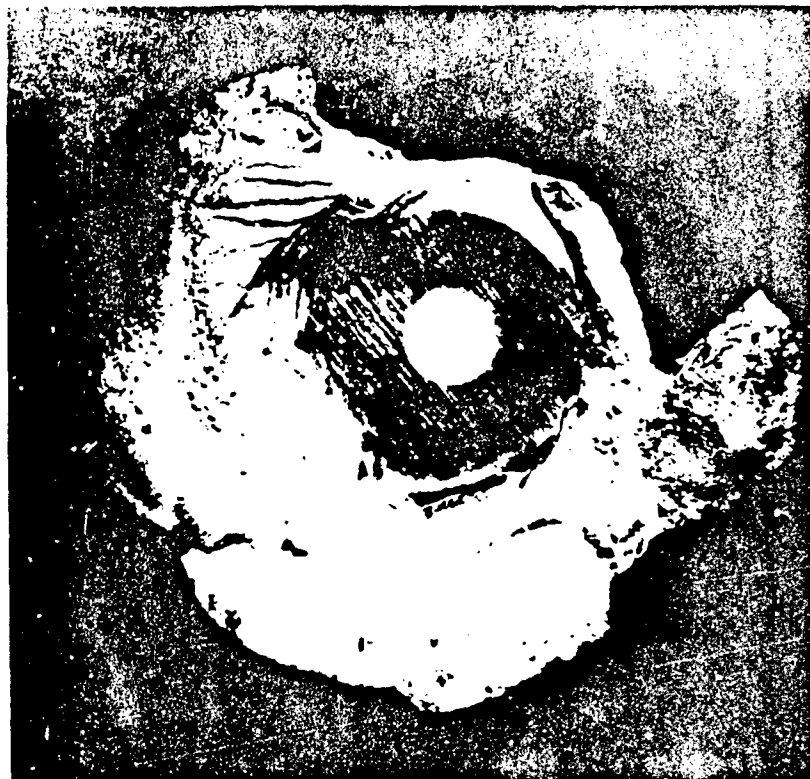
Fracture surface of a hollow stud arc welded fastener.
